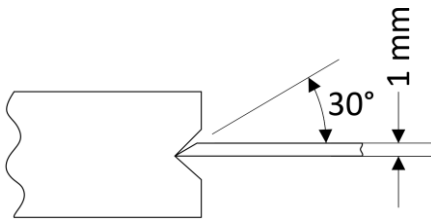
Cross-section of the plate mounting and the plate that lies in the milled groove.
